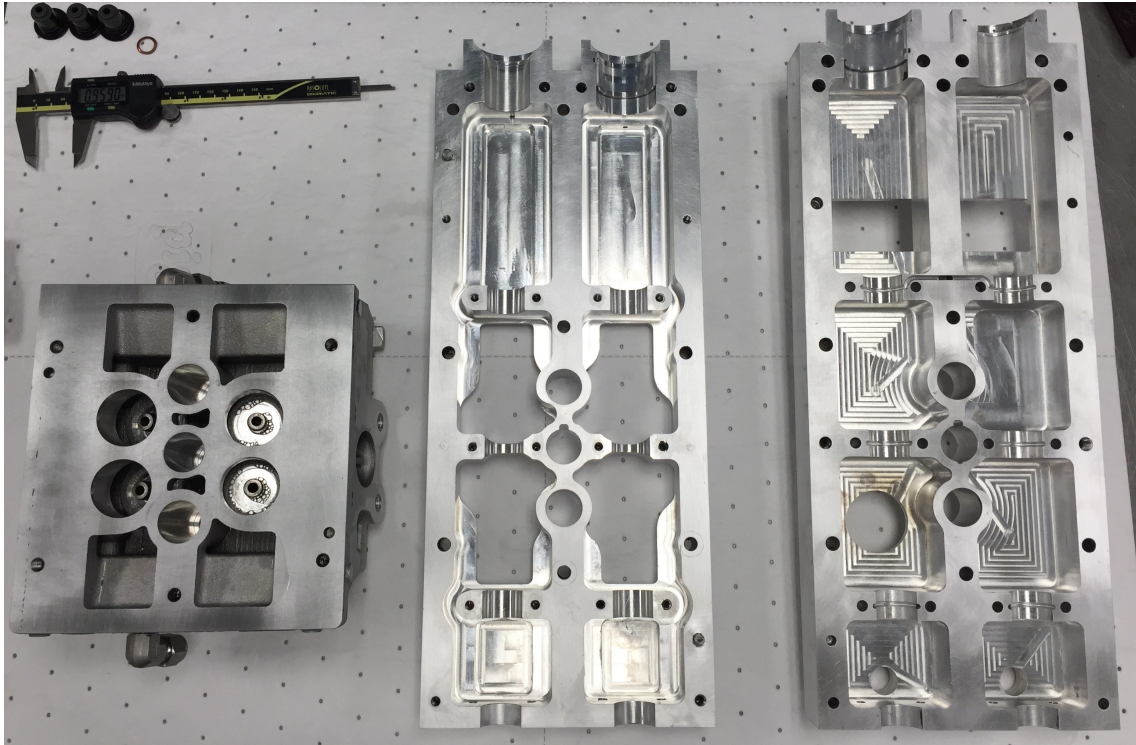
Left to Right: Custom cylinder head, Lower cam carrier, upper cam carrier.
